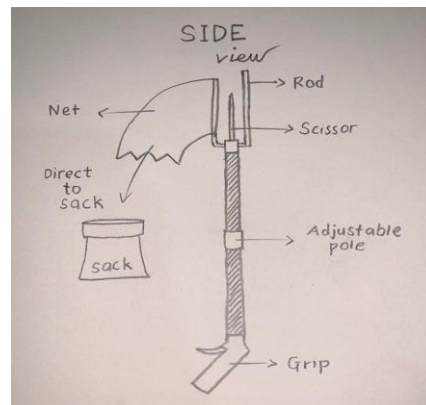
Sketch of the Side View of the Portable Black Pepper Collector.
